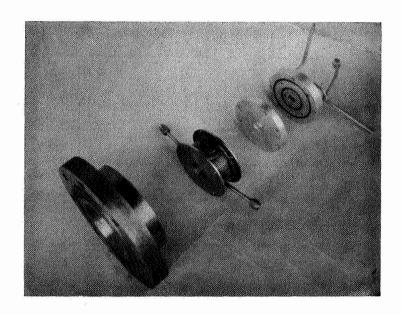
Exploded View of Combustion Chamber and Injector Assembly.
